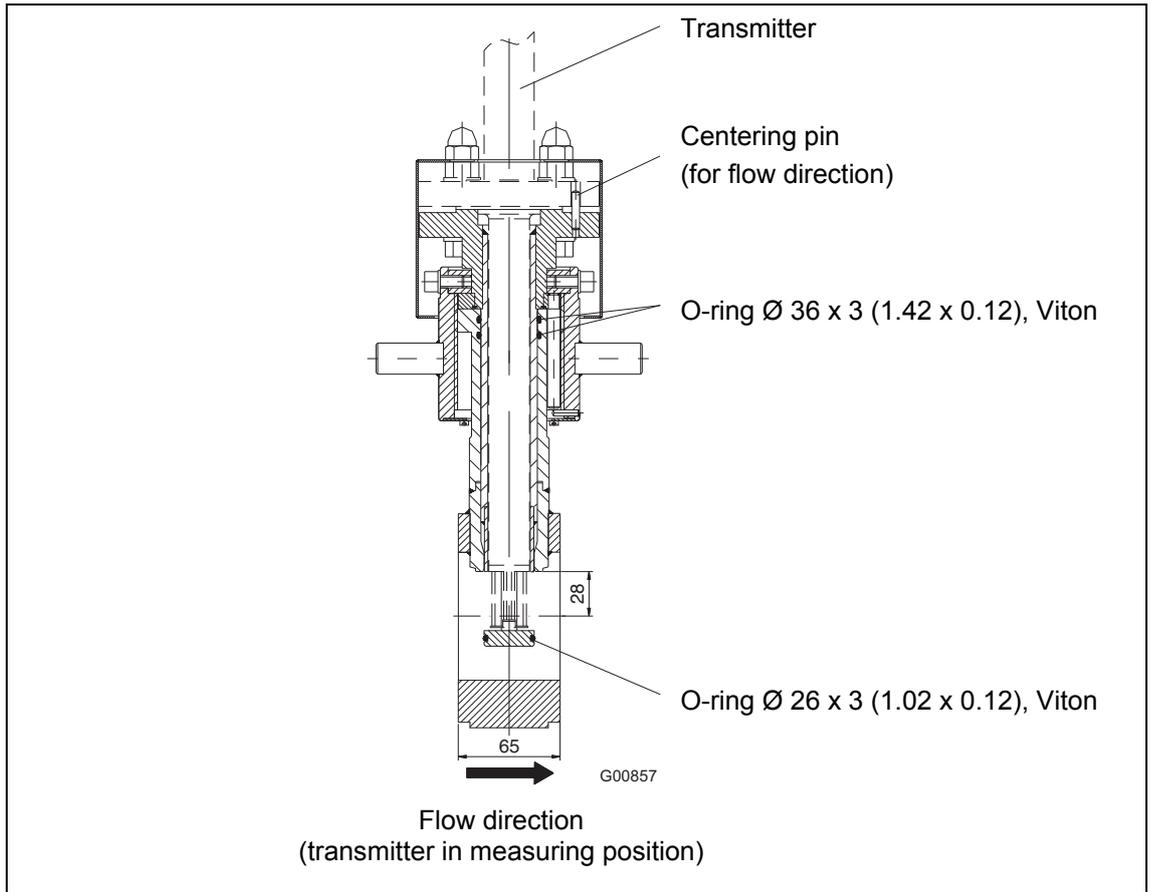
Dimensions in mm (inches). Hot tap fitting with wafer design
